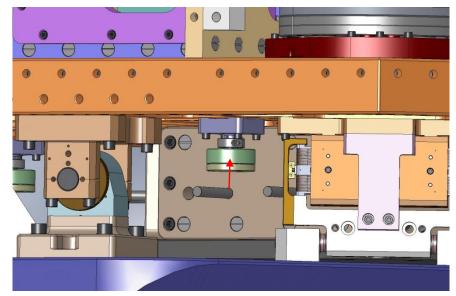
Vertical Sensor Target must be retracted before Sensor Assembly is installed.
